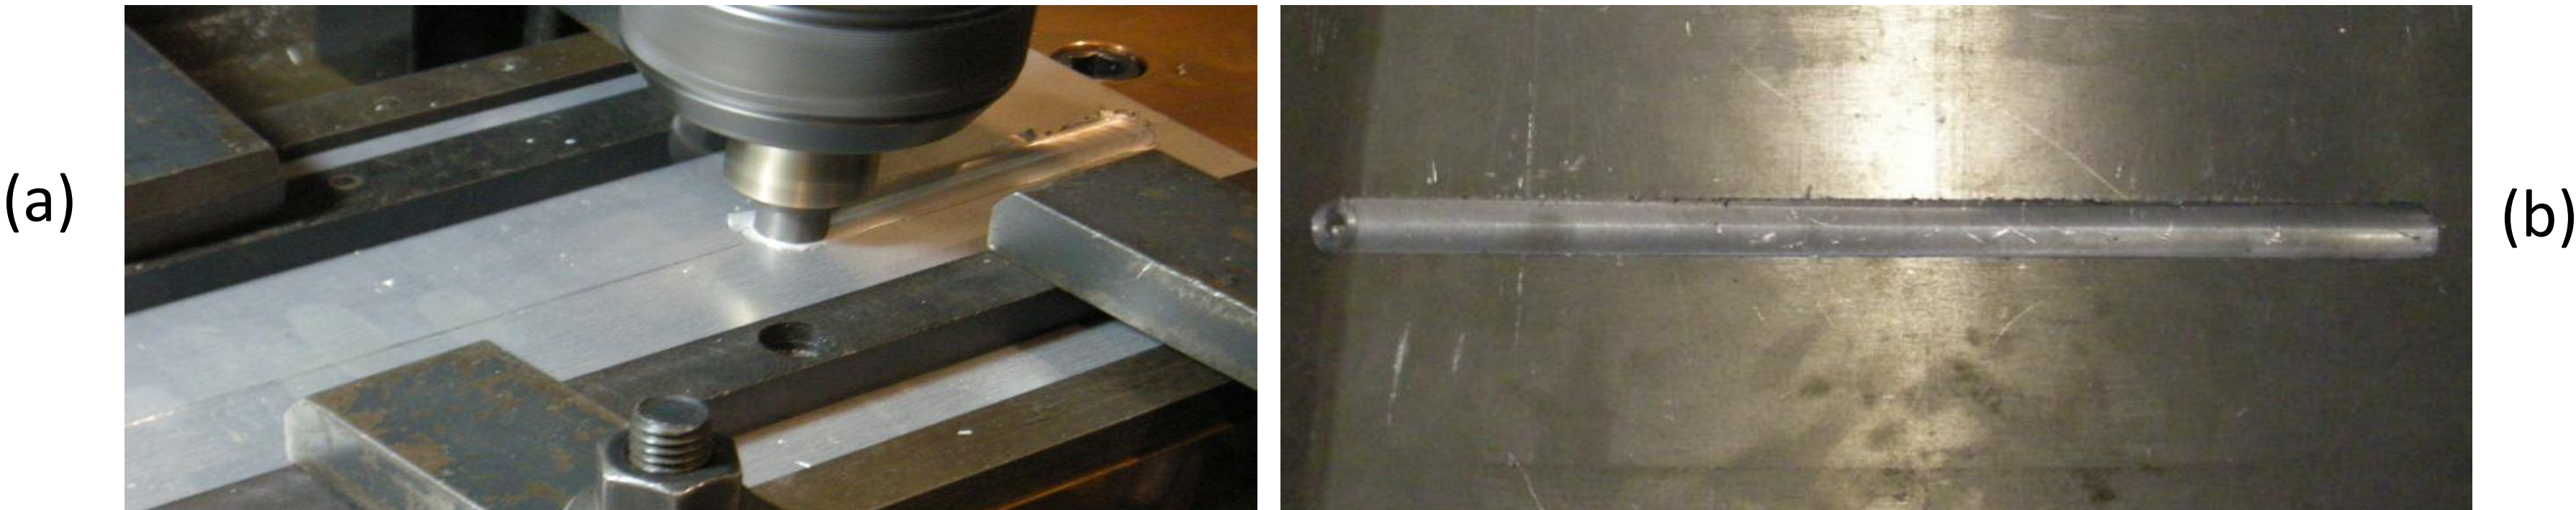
Typical schematic drawing photographs of equipment for friction stir processing: (a) FSW works by plunging a spinning tool into the joint of two materials and then traversing the rotating tool along the interface; (b) schematic showing the butt welds with the tool stirring the material together and results in a mixture of the two materials.
